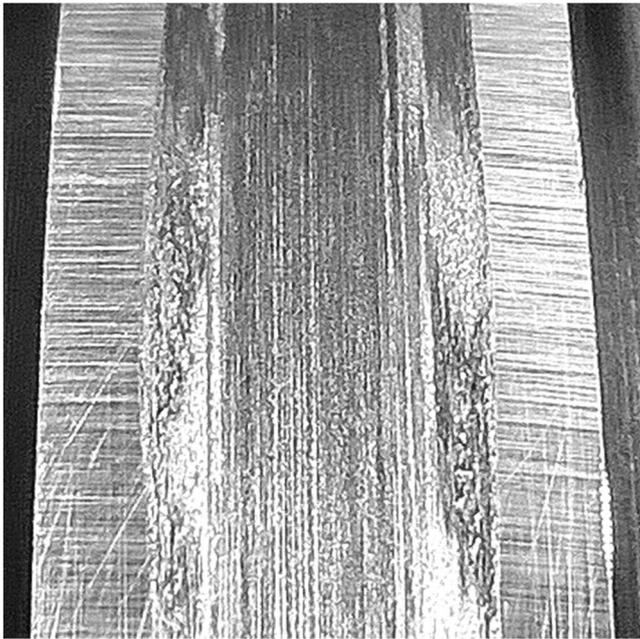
Typical specimen surface after scuffing failure.
